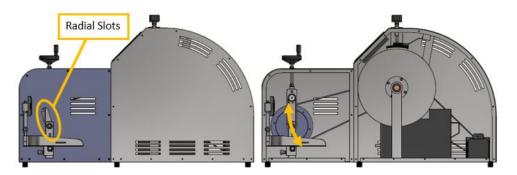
Radial slot design used to maintain pedal belt drive tension
